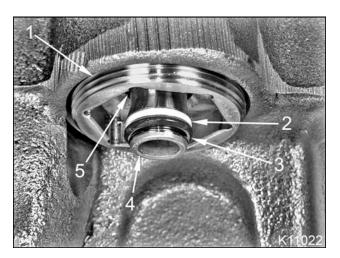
Injector oil inlet adapter installed in high-pressure oil rail
